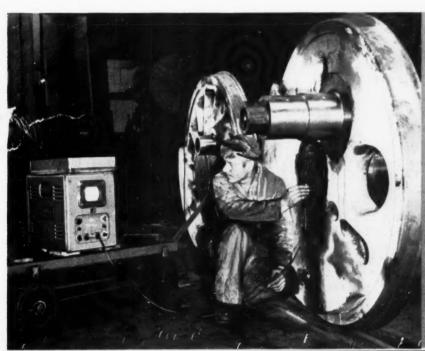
(Left) Forged railroad axles are tested ultrasonically throughout their entire length by moving the crystal searching unit over one end of axle.
